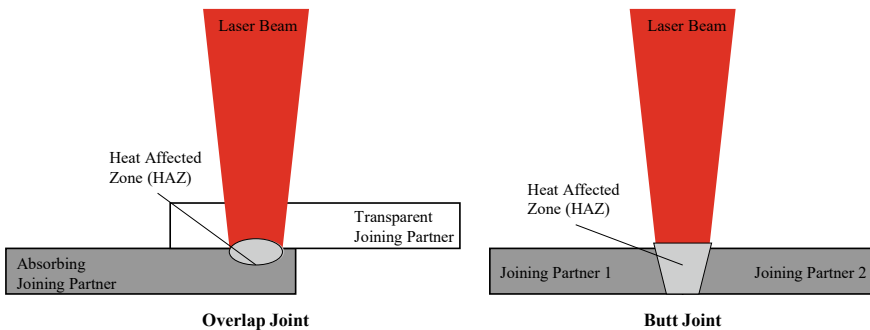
Typical joint configurations for the laser beam welding of plastics
